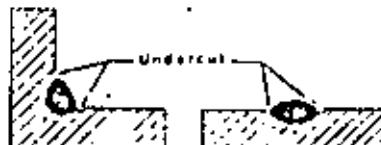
Undercut in a weld. The effect is undesirable from the appearance standpoint and may weaken the joint.
